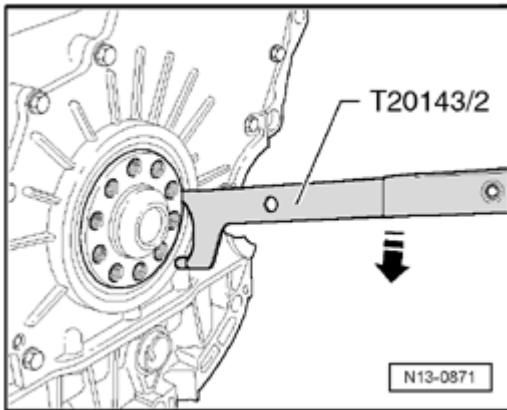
Supporting Pulling Hook T20143/2 On Sealing Flange And Pry Out Sealing Ring
